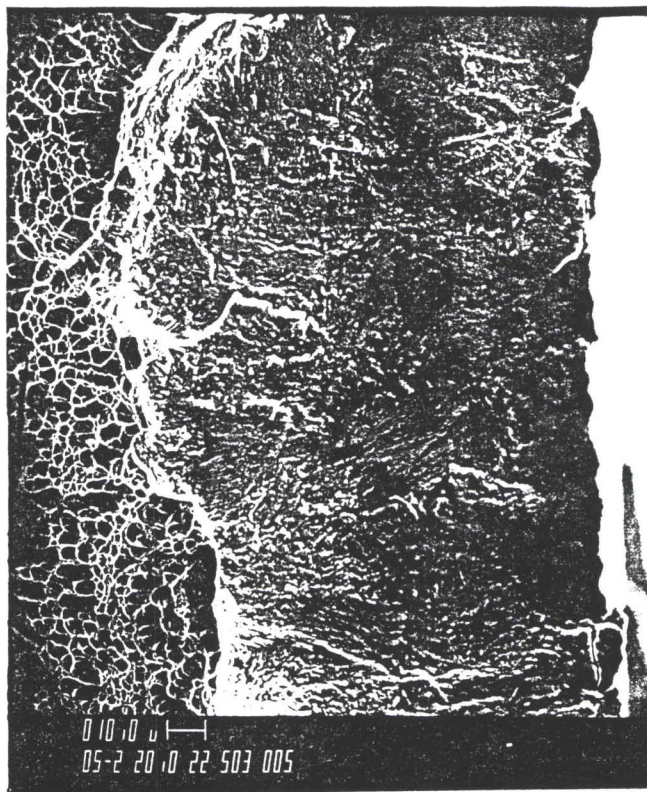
Timetal 21S, 700 MPa exhibiting dimpling at edge of fatigue crack zone.
